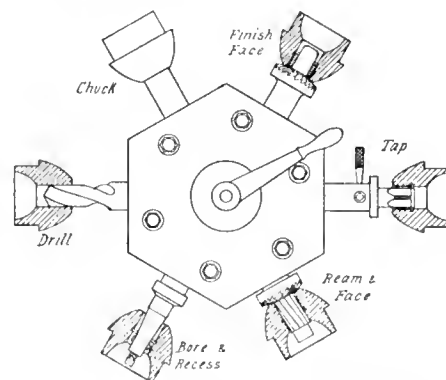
TOOL LAYOUT FOR FINISHING SOCKET NOSE.
